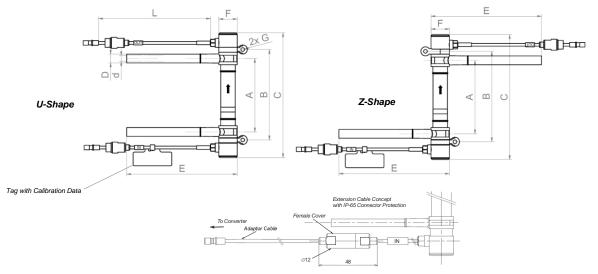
Dimension legend for LFS-04 and LFS-08 sensors -> left: U-shape, right: Z-shape
